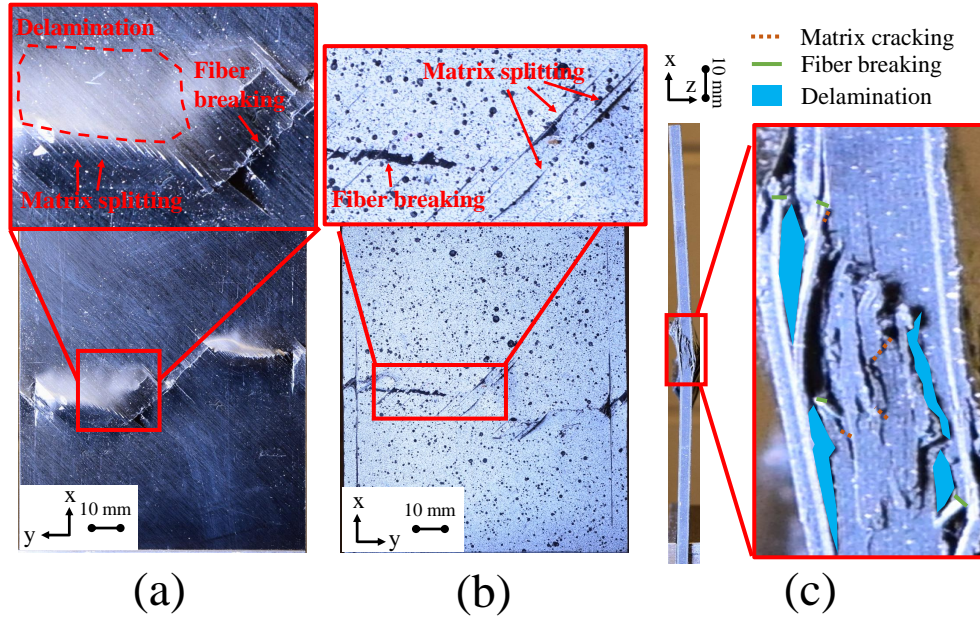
Surface inspections of the CAI-induced damage of a layup C sample: (a) non-impacted surface, (b) impacted surface, and (c) side view.
